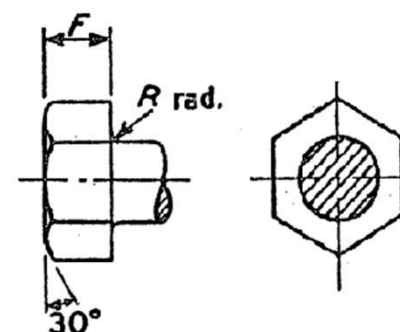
Full Bearing Alternative Type of Head Permissible on Bolts and Screw
